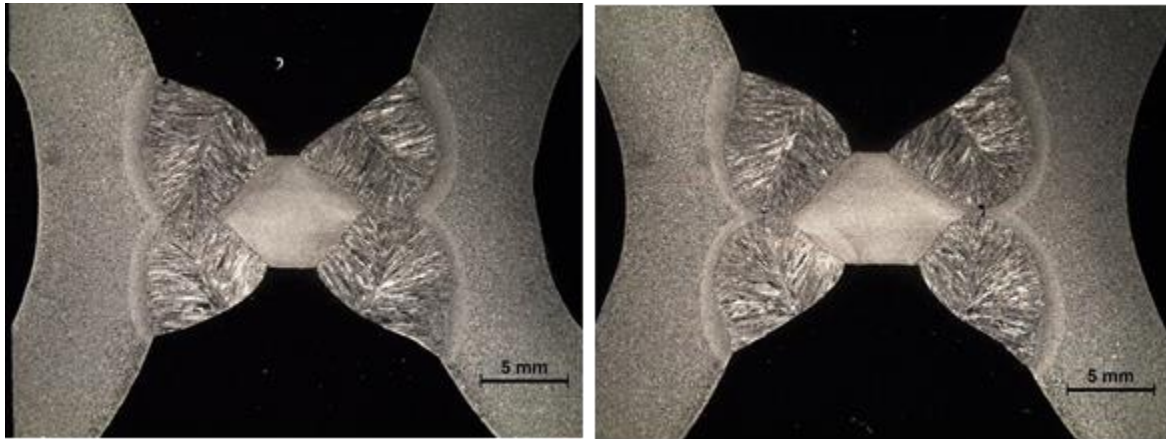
n Macrographs from the final T92 6-tube prototype sub-panel at T3-T4 weld.
